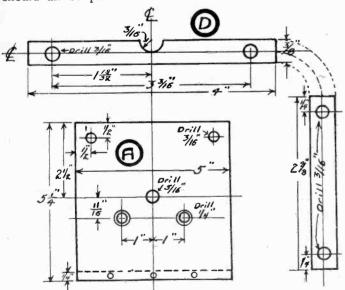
Panel layout (A) with correct drilling dimensions for all holes. Brass brace (D) to enable the coil to be mounted on the panel without drilling additional holes.
